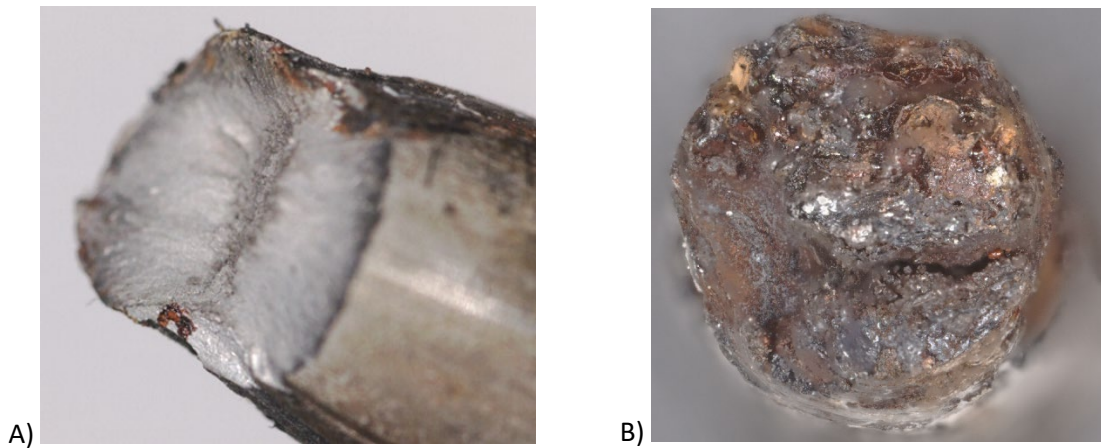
Example of (A) ductile failure with partial cup/cone fracture pattern; (B) brittle failure.
